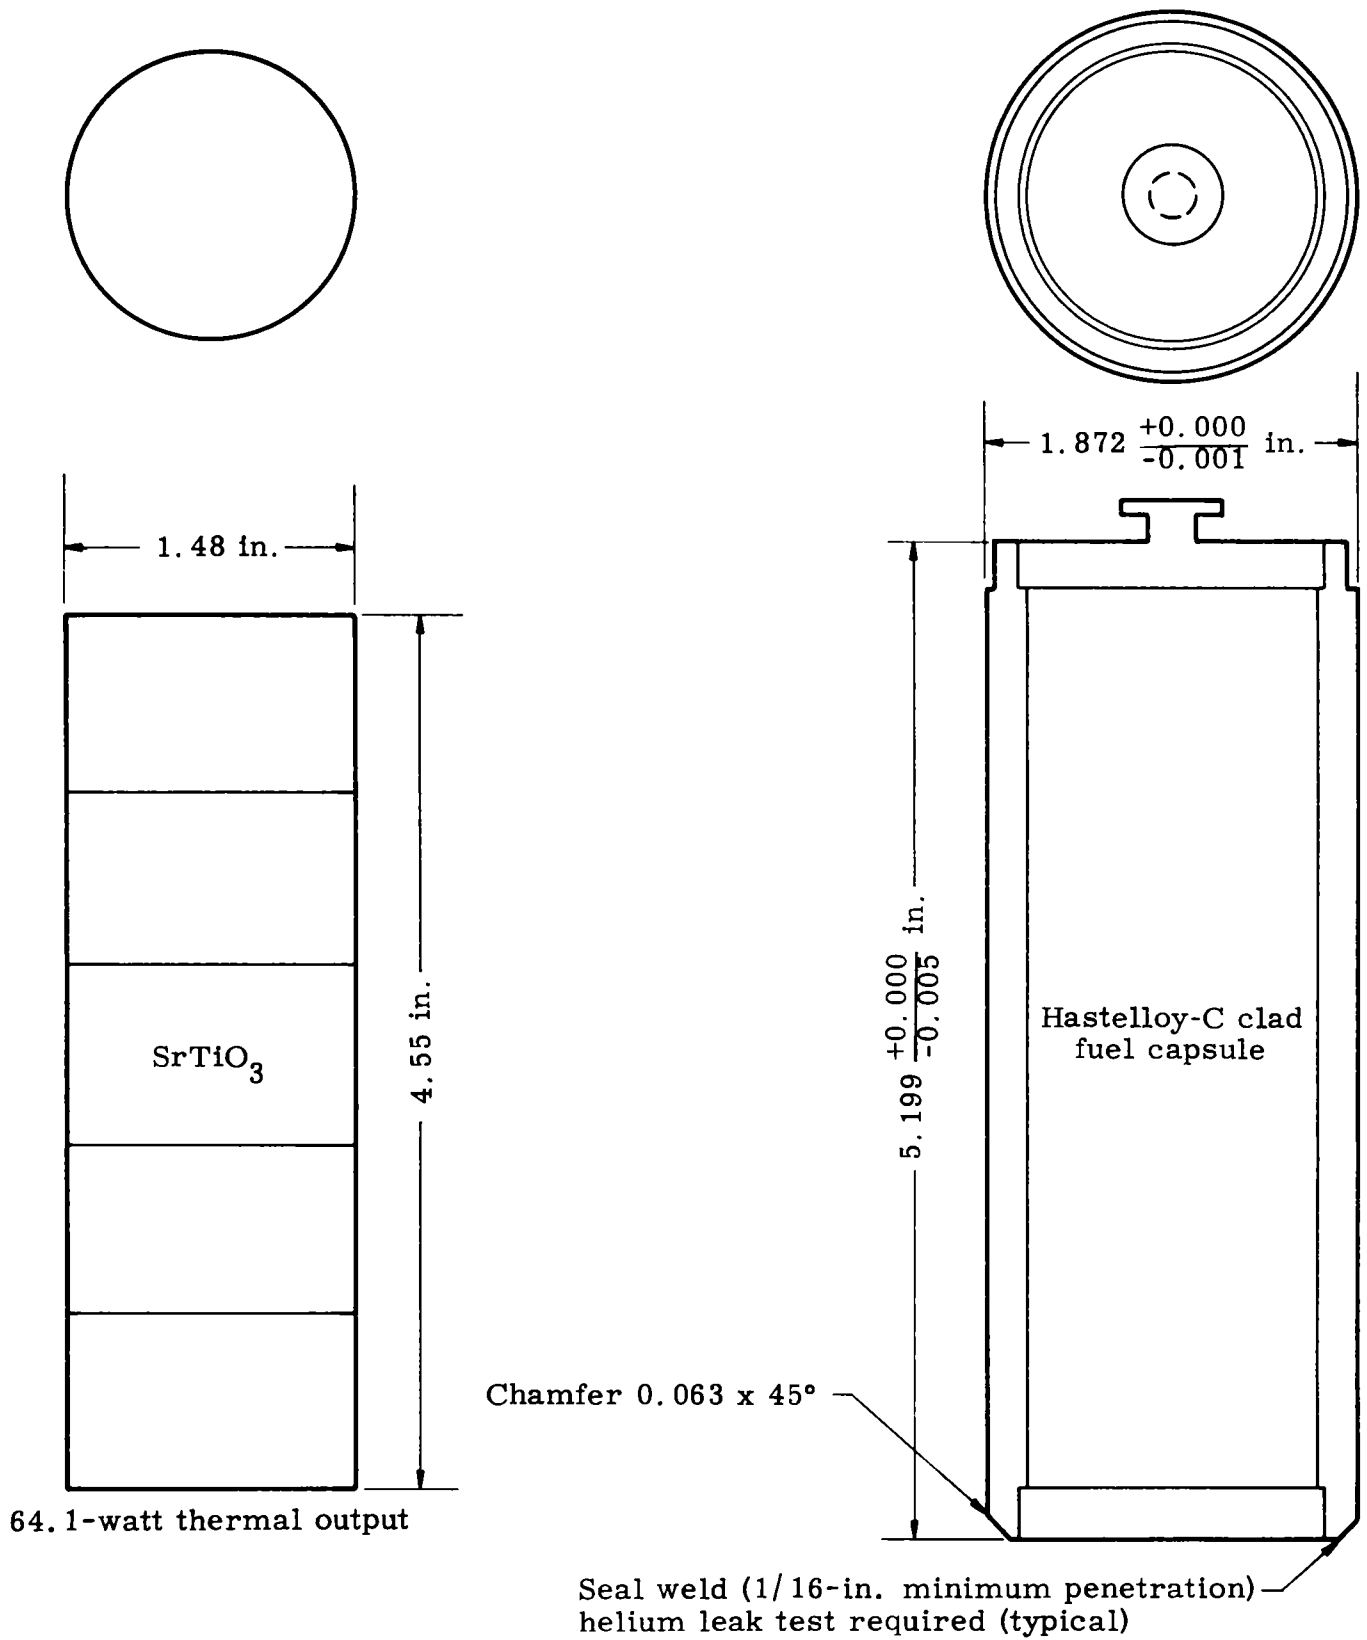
Fuel Capsule Assembly of Strontium-90 Generator
